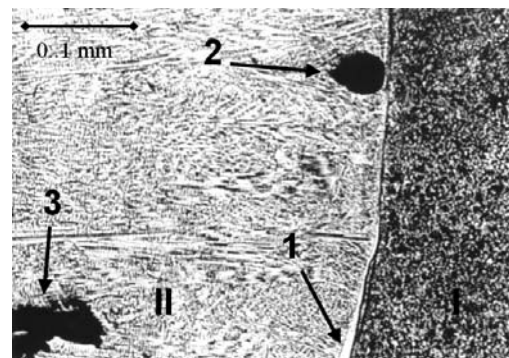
[5]. Padding weld Lincore 15CrMn – after pad welding, cooling in still air. I – base material, II – padding weld. Dendritic structure of the padding weld consisting of austenite and carbides; 1 – solid solution area of heterogeneous thickness in the weld penetration zone; 2 – blow hole; 3 – final fragment of the crack of the 80% padding weld thickness. Etch. 3% HNO<sub>3</sub>. Light microscope
